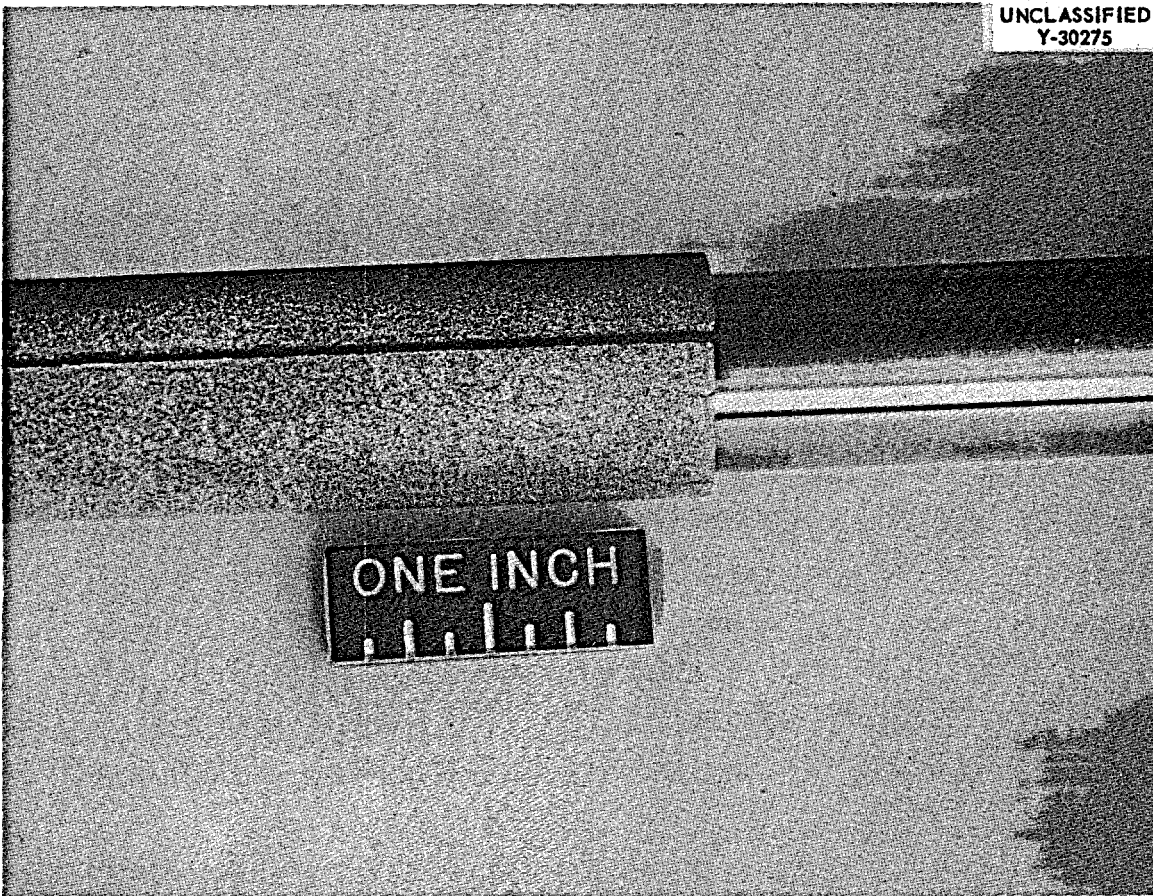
Prefabricated Porous Nickel Tube Surrounding a $\frac{5}{8}$ -in.-OD Inconel Tube. The outer Inconel tube is not shown.
